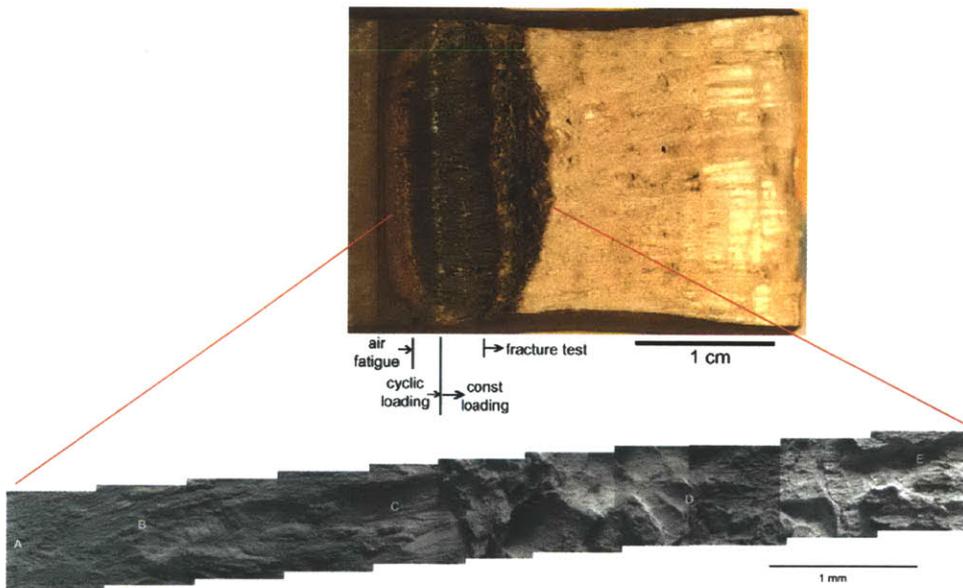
Macro and SEM fractograph series for 5,000 h aged at 400 °C low-ferrite 316L weld specimen 124.
